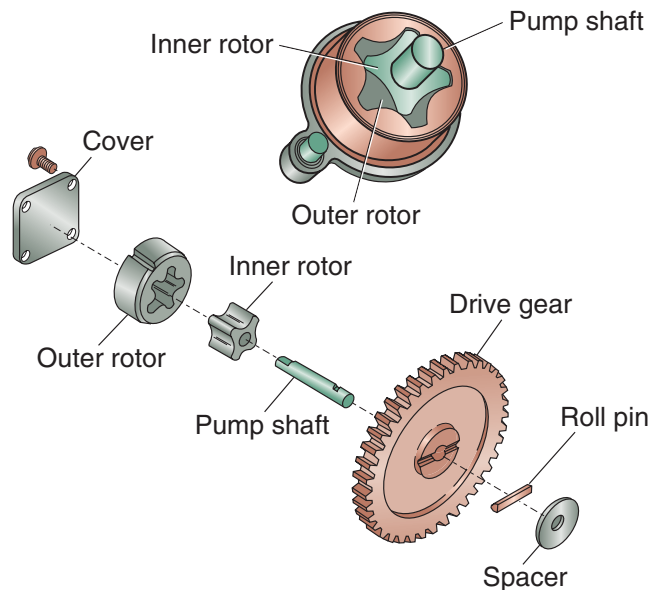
The rotor-type pump is found commonly in full pressure lubrication systems.
